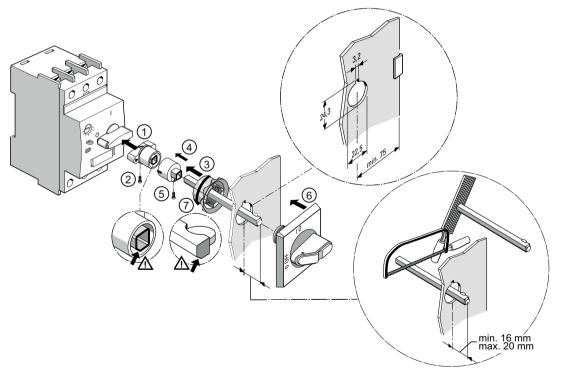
Mounting the door-coupling rotary operating mechanism
